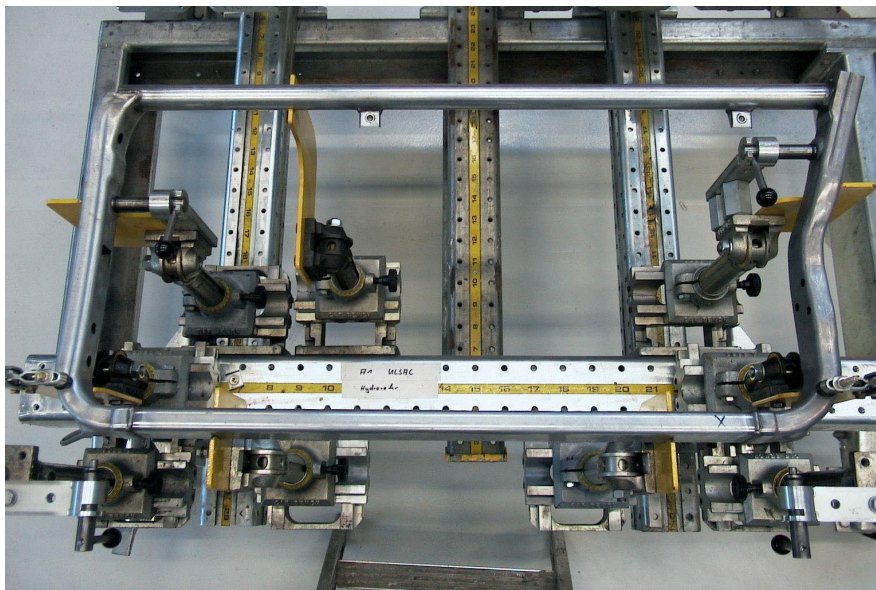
Subassembly #1: Front Door Frame in Assembly fixture
